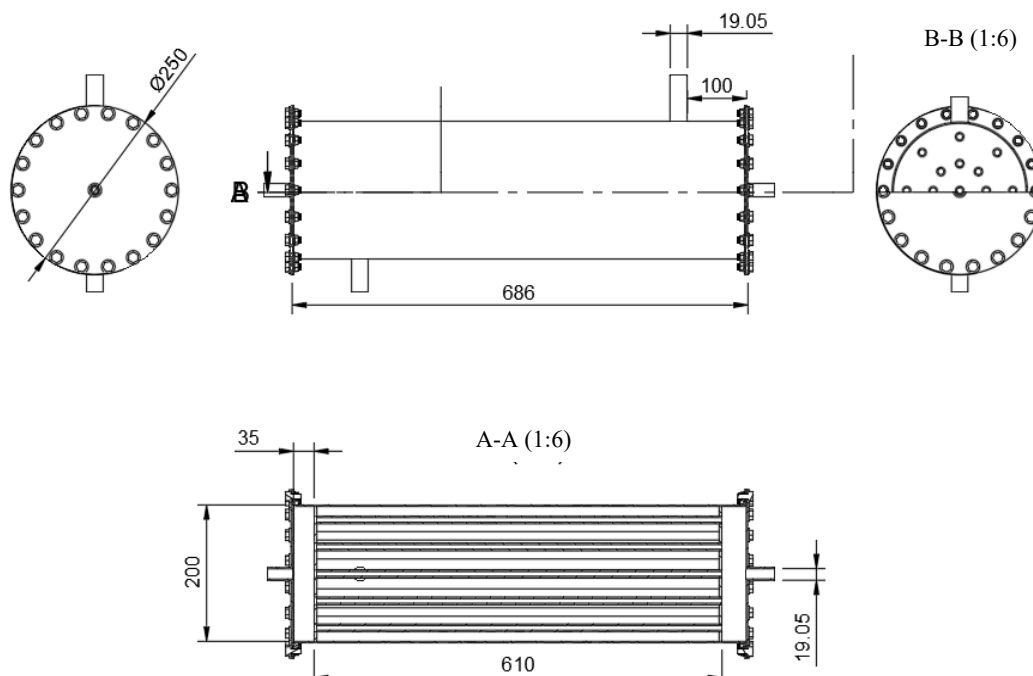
Cross-sectional view of shell and tube heat exchanger.
